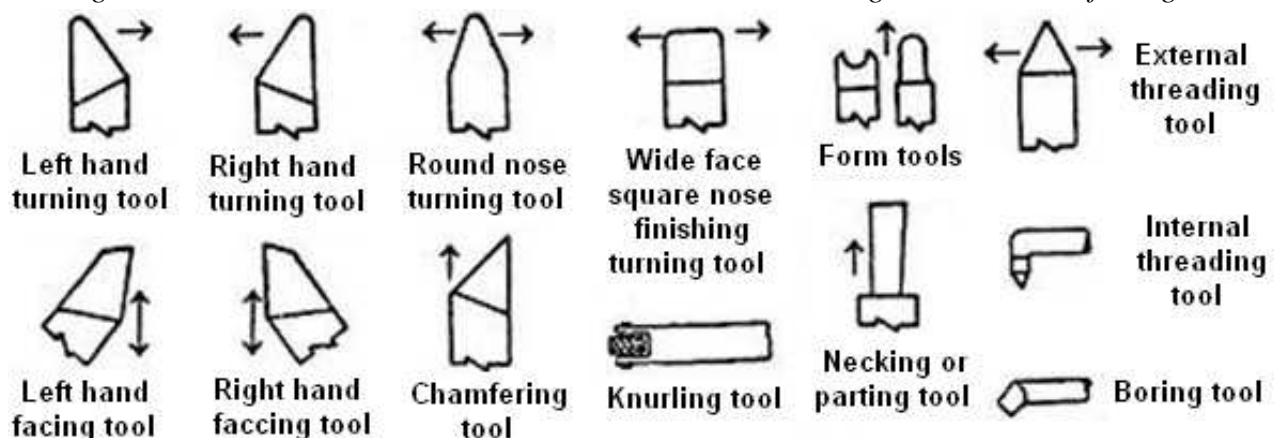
Various tools used in centre lathe according to the method of using the tool
